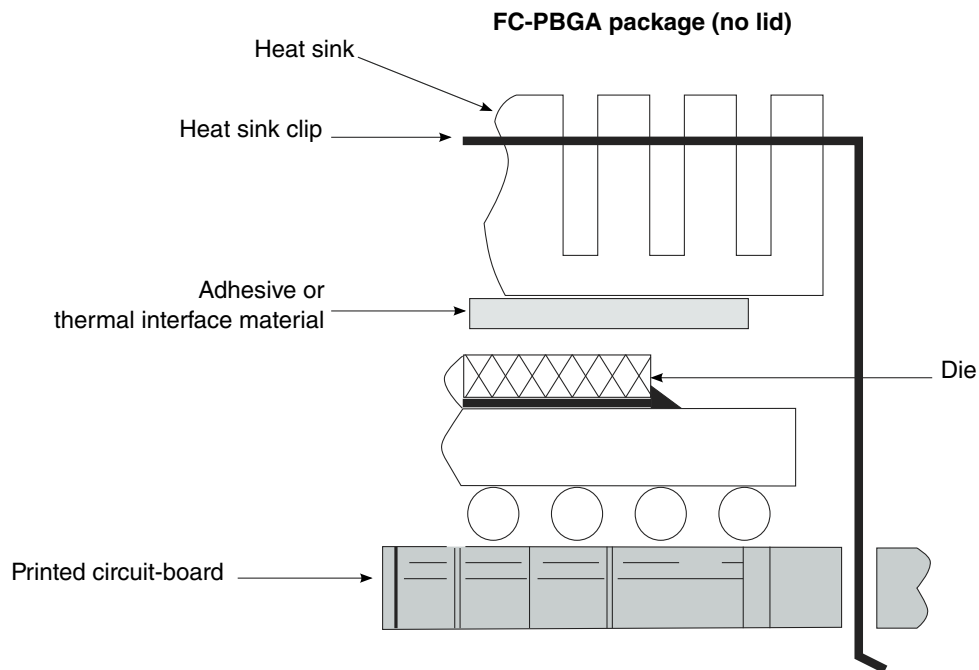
Package exploded, cross-sectional view-FC-PBGA (no lid)
